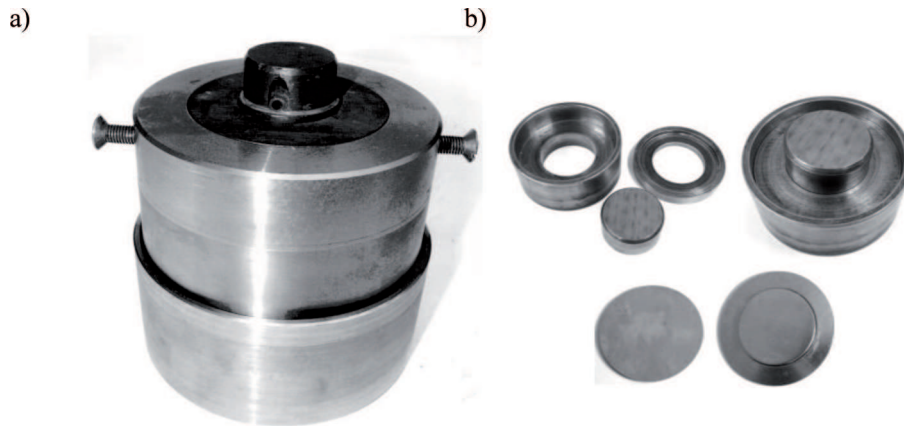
Tools for weldability tests of aluminum alloys (a) complete tool set, (b) blanking punch, cutting board and sheared auxiliary disks
